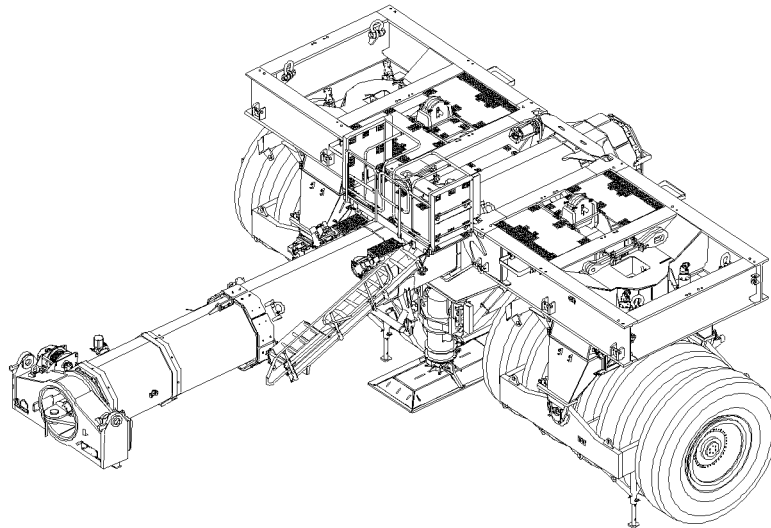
Fall protection equipment on the ballast trailer — overview
